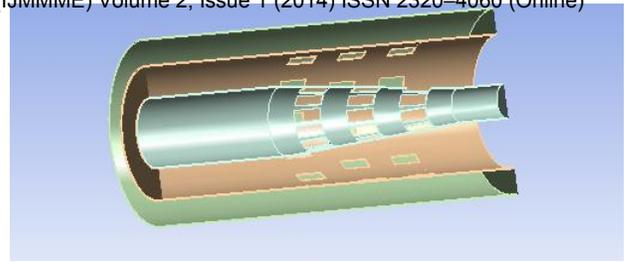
Cut section view of the multi chamber flow splitting muffler.
